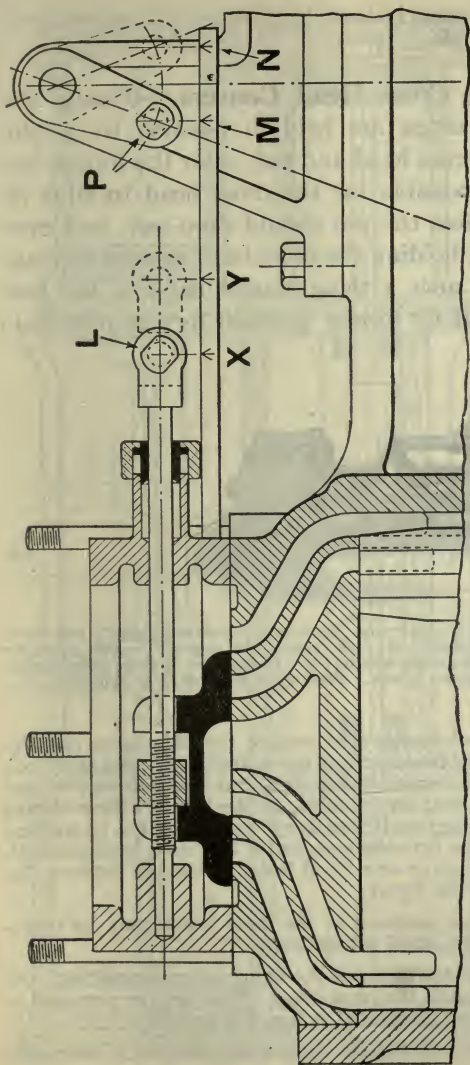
Valve and valve gear of duplex pump, showing rocker in its two extreme positions M and N, and the corresponding position of the valve stem end X and Y.
